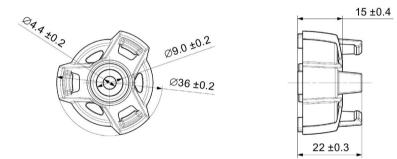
Dimension drawing of spacer 6GT2690-0AK00
